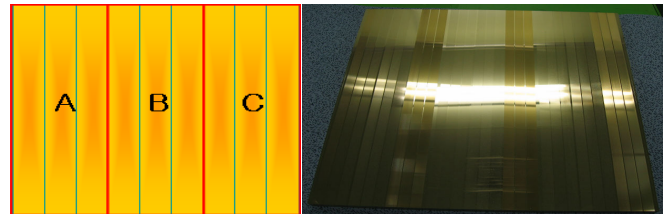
Machined large area mold with micro rectangular pattern for injection molding(400x400mm²)
